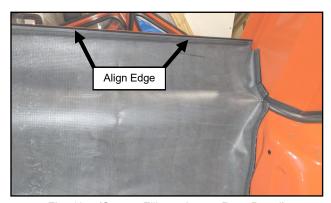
(Secure Filler to Lower Rear Panel)
